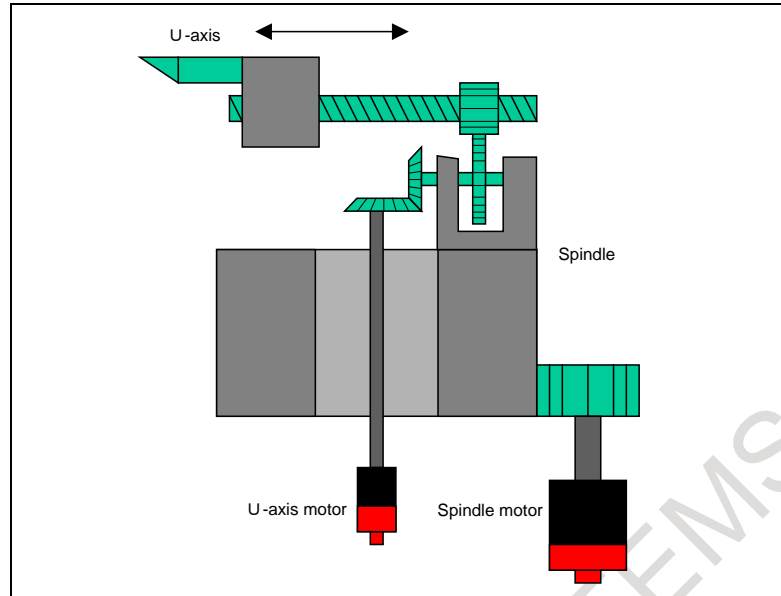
(c) Example of the structure of a machine having the U-axis
